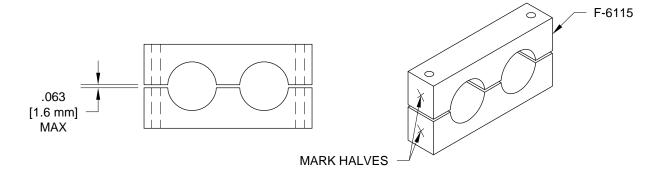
SPLIT RUDDER PEDAL BEARING BLOCK
